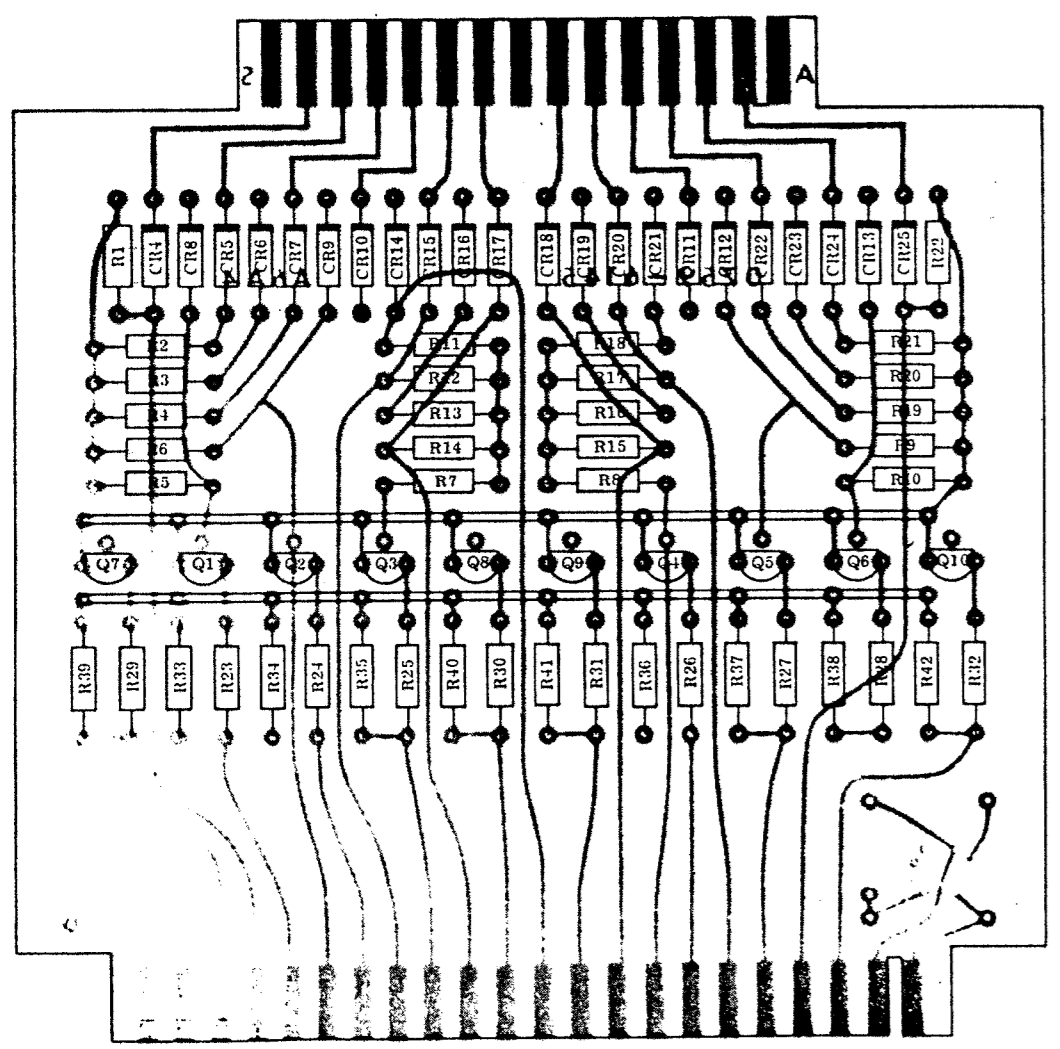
Level Shift/Remote Control PWB Component Location Drawing
